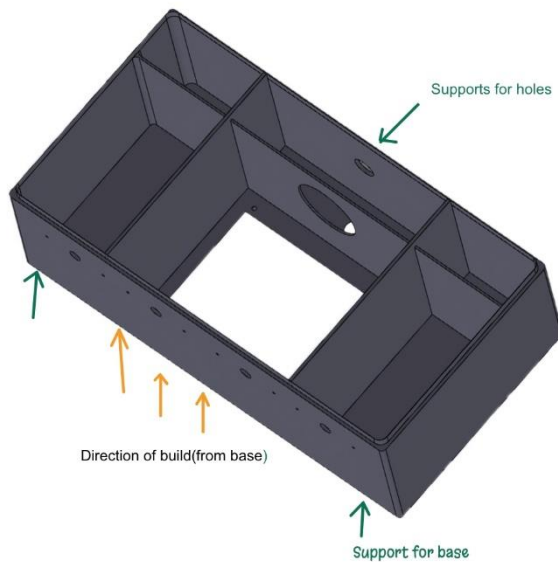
Isometric view of the part showing the print orientation and direction with support structure.
